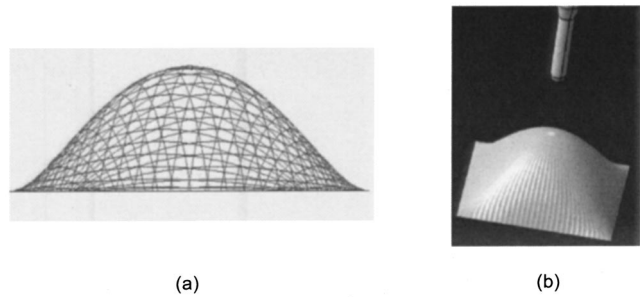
(a) Sculptured part; (b) steepest-ascending tool paths of the sculptured part
